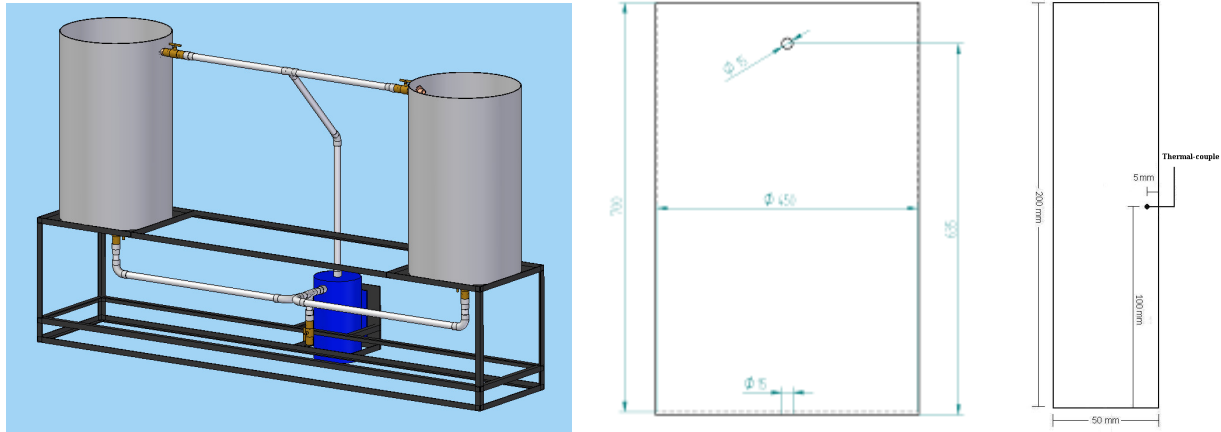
Quench system assembly (left) quench tank dimensions (center) and thermocouple position into sample (right, dimensions in mm).
